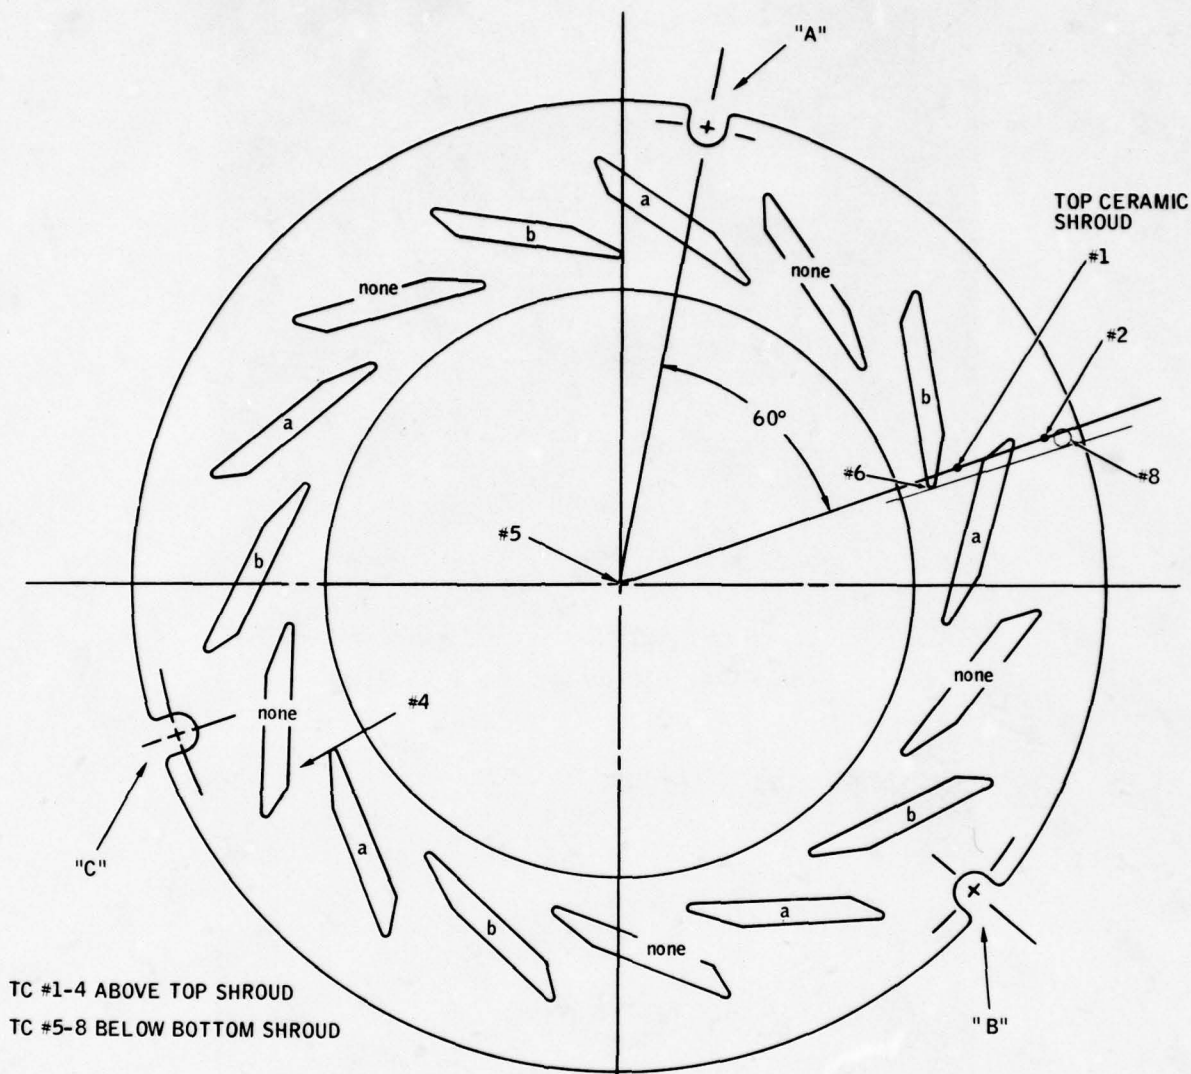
Thermocouple Location and Glass Joint Filler Material Location
